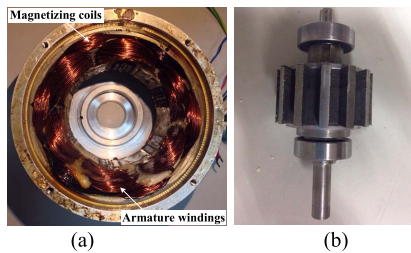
6-/13-pole SF-HMMM prototype. (a) Stator assembly. (b) Rotor assembly.
